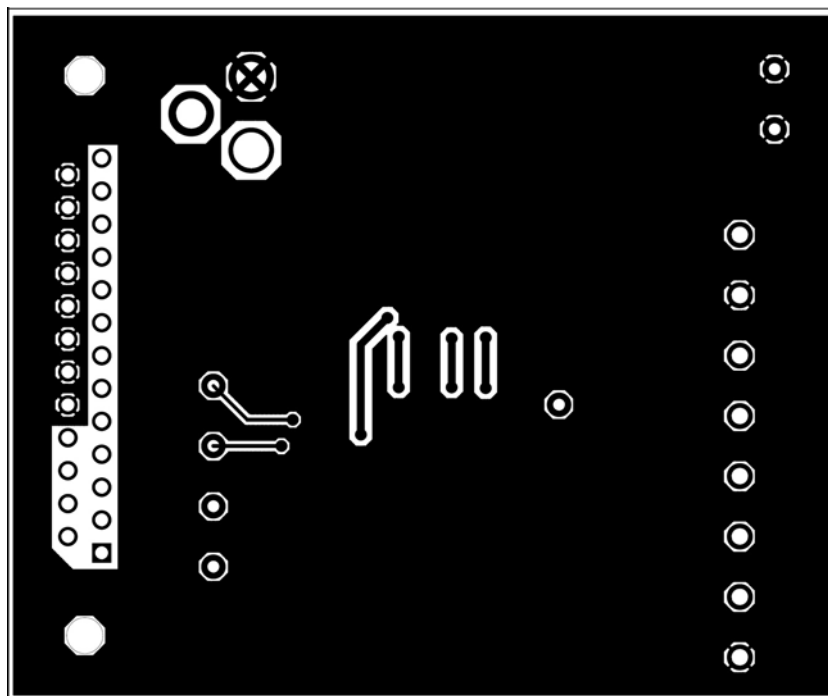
ATA6826-DK Design Kit, Basic Application Board; Bottom Side, Top View (as if PCB were Transparent)
